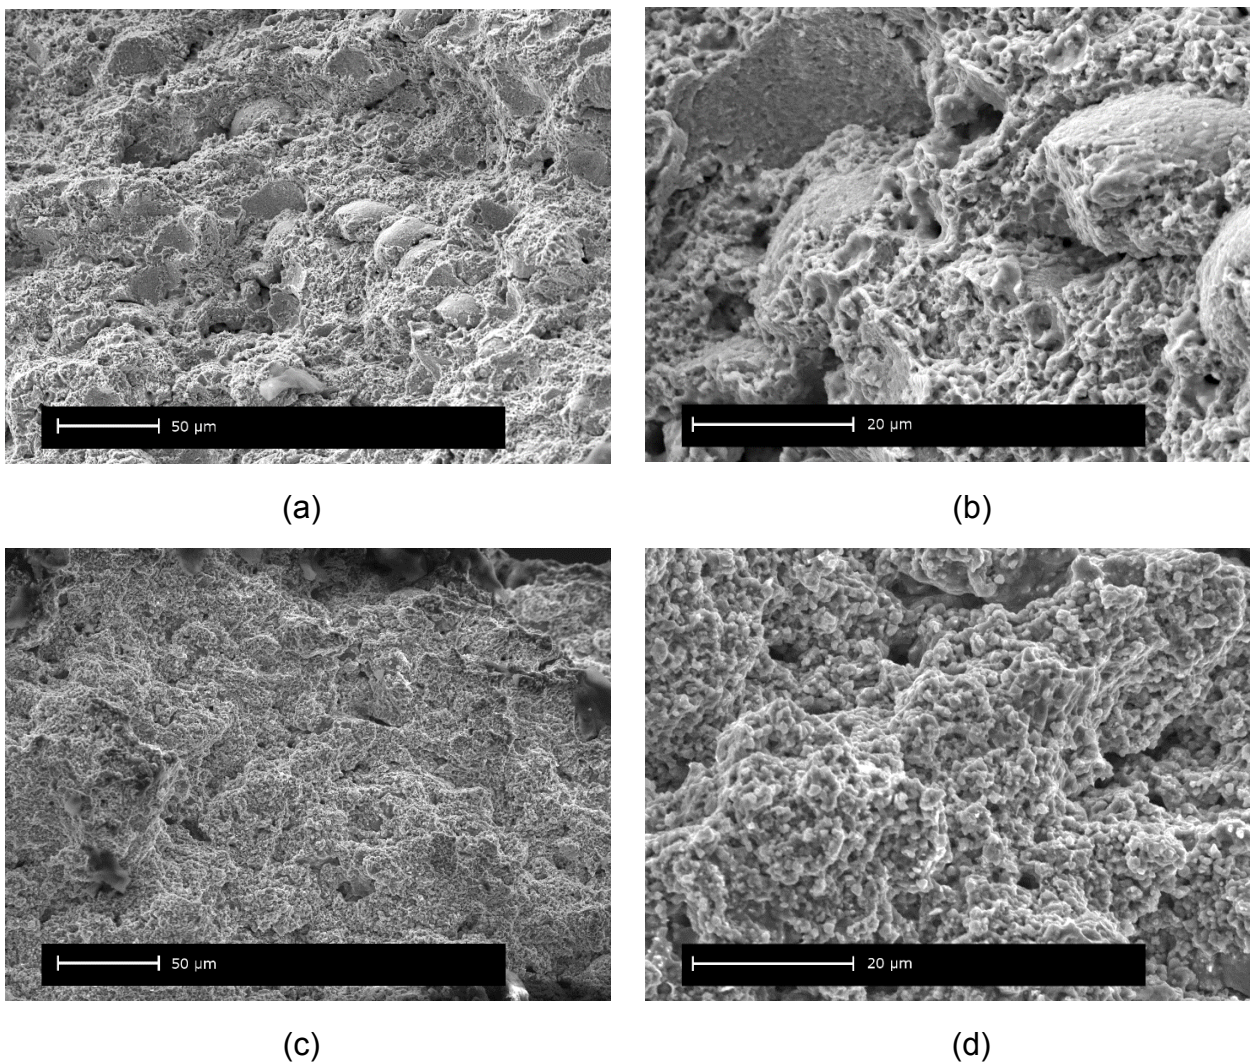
Secondary electron images showing the fracture surfaces of the coating specimens following miniature specimen tensile tests at (a-b) 500°C and (c-d) 700°C.
